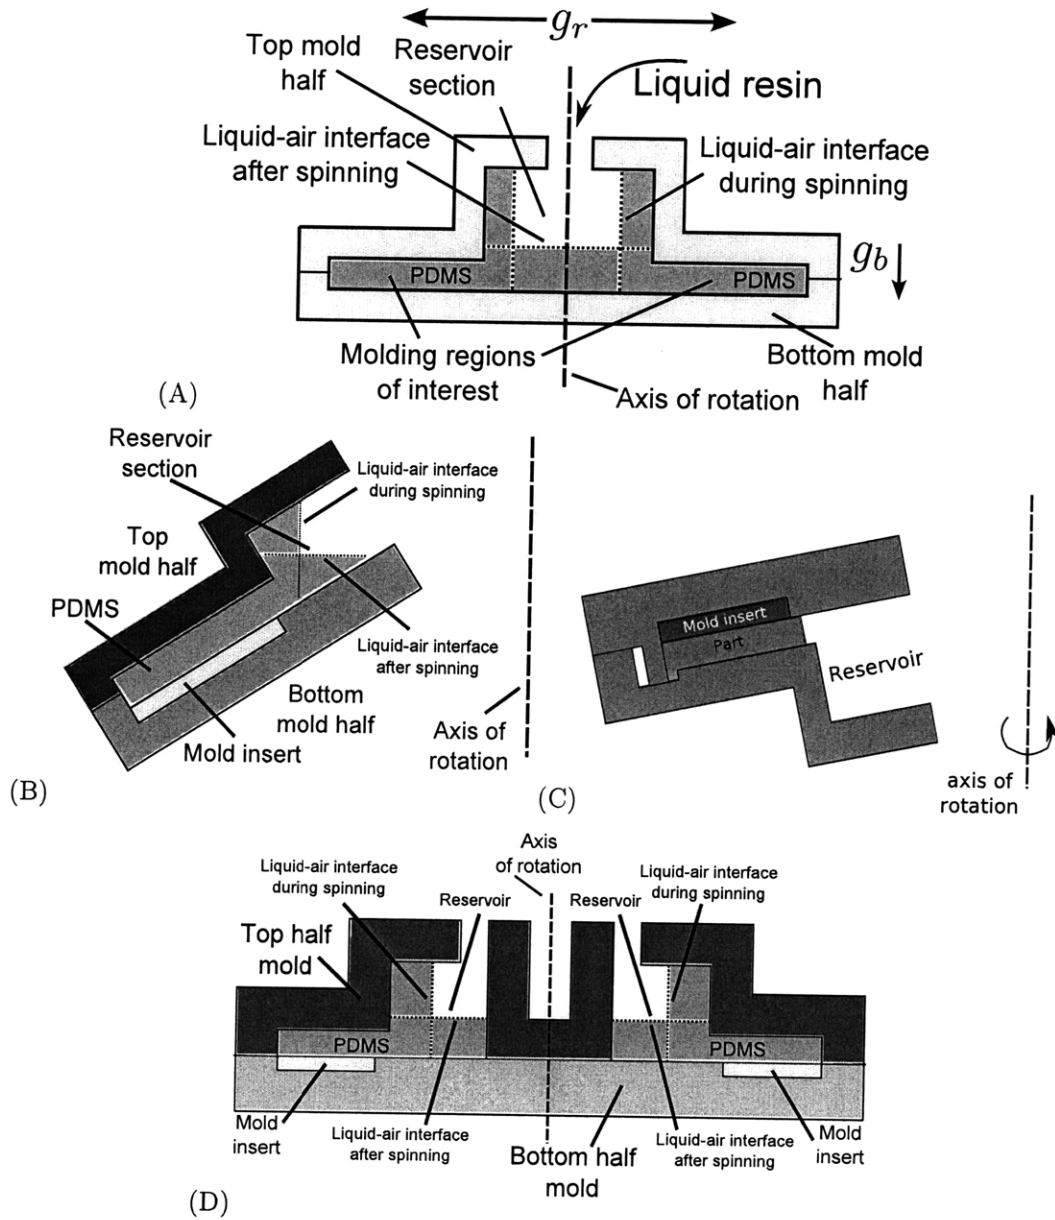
(A) Mold cavity for centrifugal casting being spun about an axis of rotation. (B) Centrifugal mold design tilted at an angle with an open end. (C) Another mold design tilted at an angle with an open end. (D) Centrifugal mold design for producing two separate parts.
